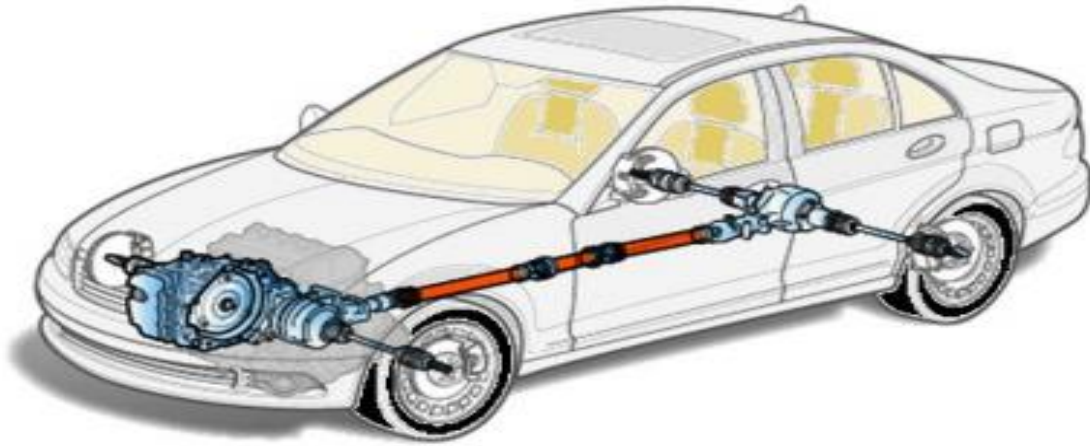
Driveshaft arrangement in rear wheel drive [38].
